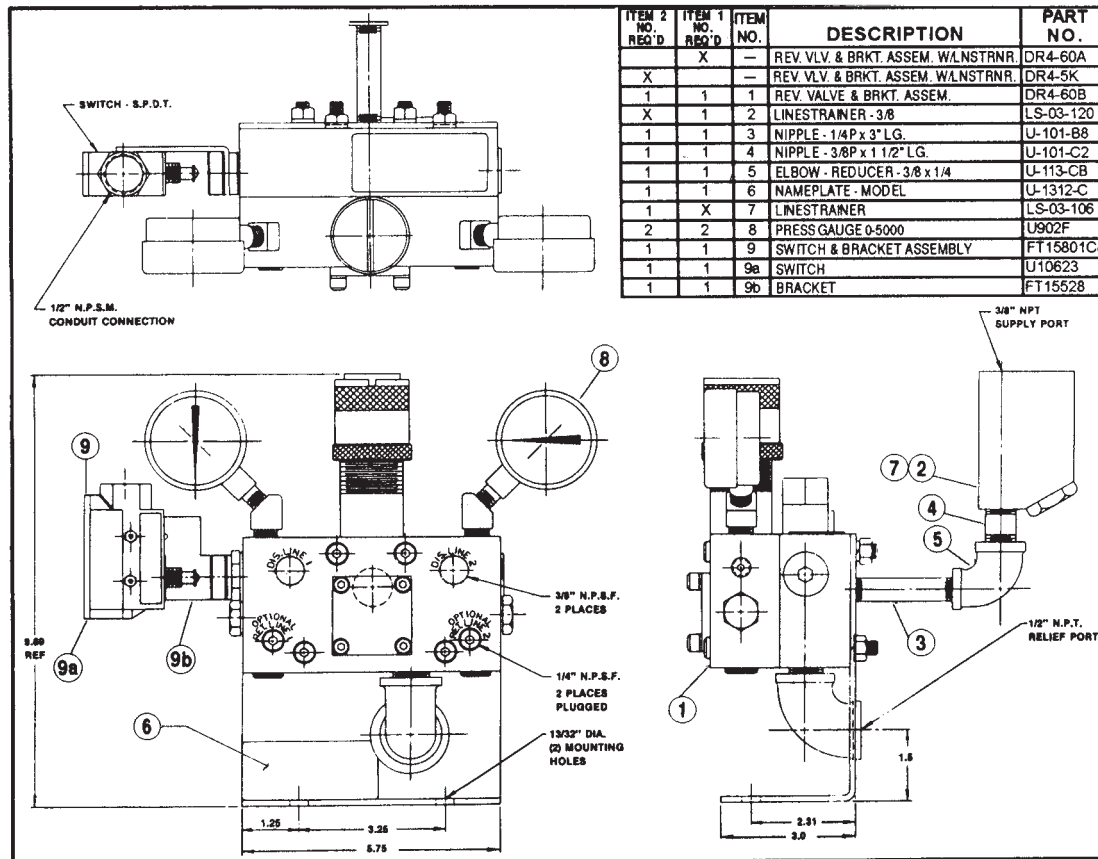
DR4-60A Reversing Valve and Bracket Mounting Assembly (DR4-59), with Line Strainer (LS-03-120) for Grease-Non-Return Systems.
